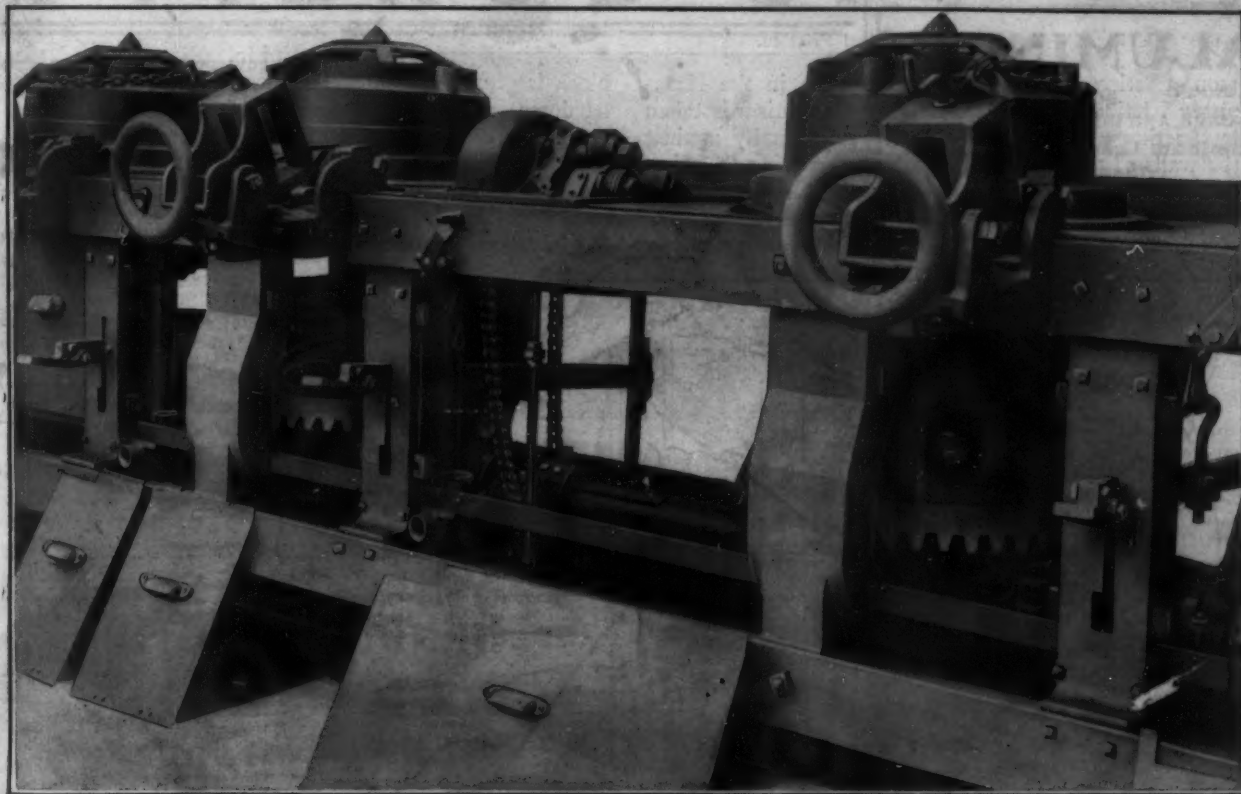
The Humphrey Improved Wire Drawing Bench.
